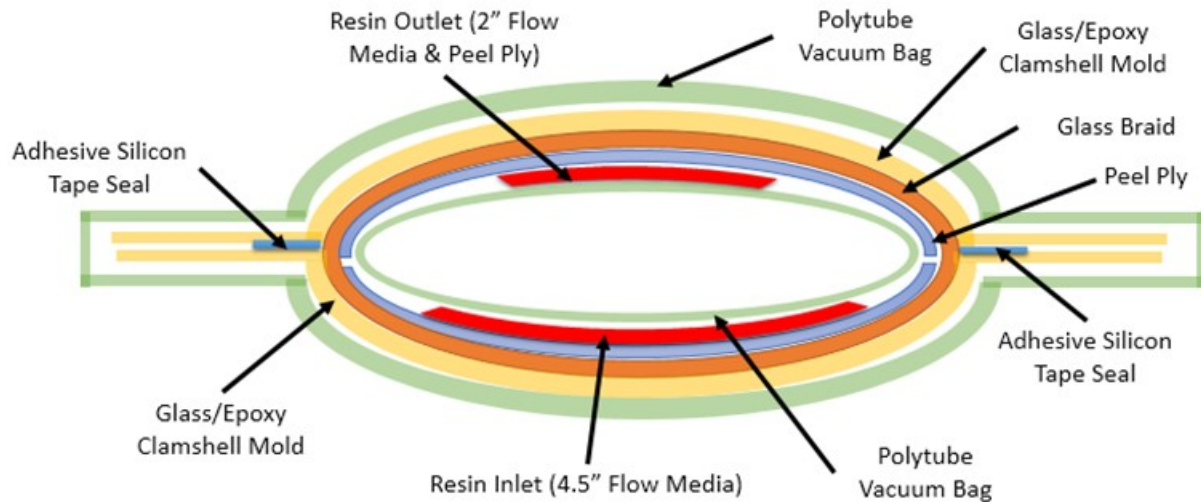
Schematic of preliminary materials stack-up in the assembled mold halves
